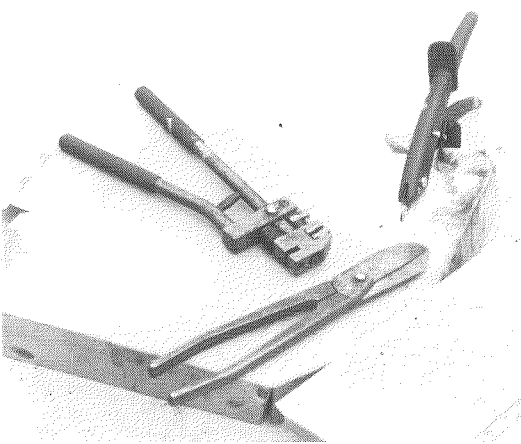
Metal cutting tools and formers. A power nibbler can also be useful but sometimes can be a little bulky for confined spaces.
